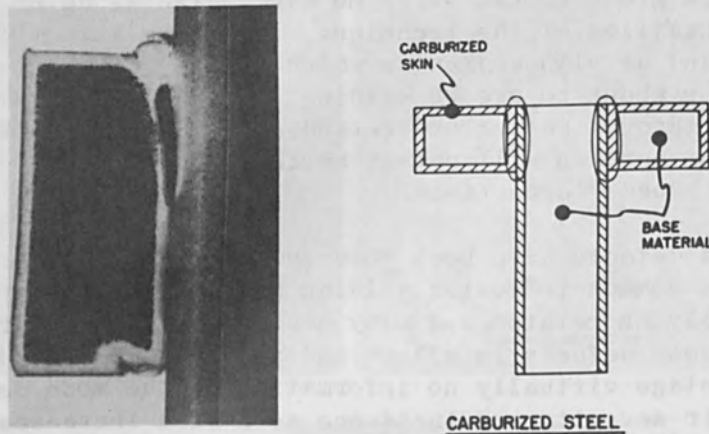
Welding of carburized material at the weld interphase. (Courtesy: J. R. King, Sciaky.)
